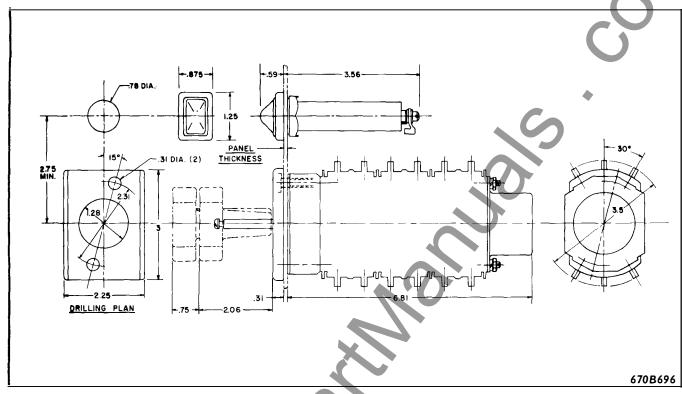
Outline and Drilling Plan of the Type W-2 Test Switch and Indicating Lamps Used for SKB or SKB-1 Testing
